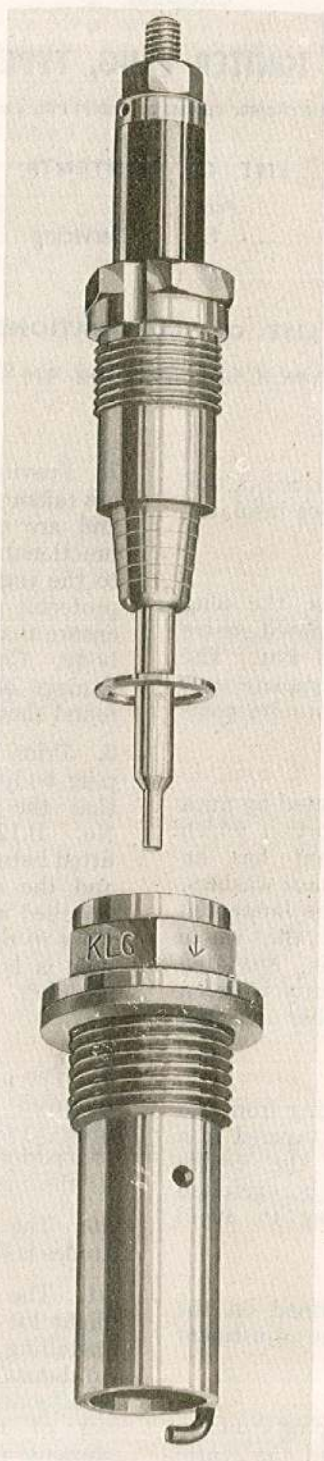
Exploded view of K.L.G. igniter plug, type 994/9
